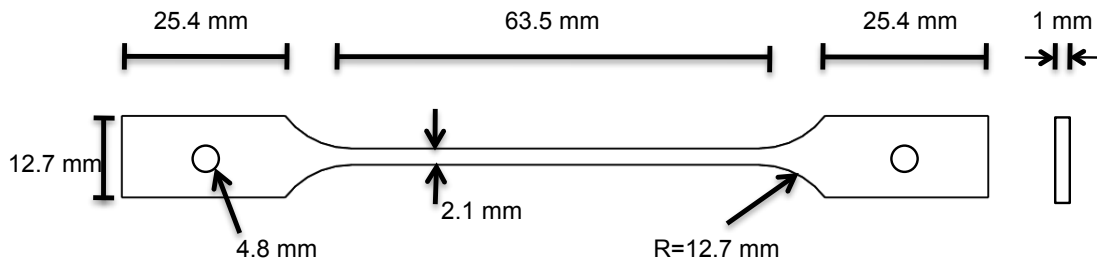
Flat sheet fatigue specimen dimensions used in current study
